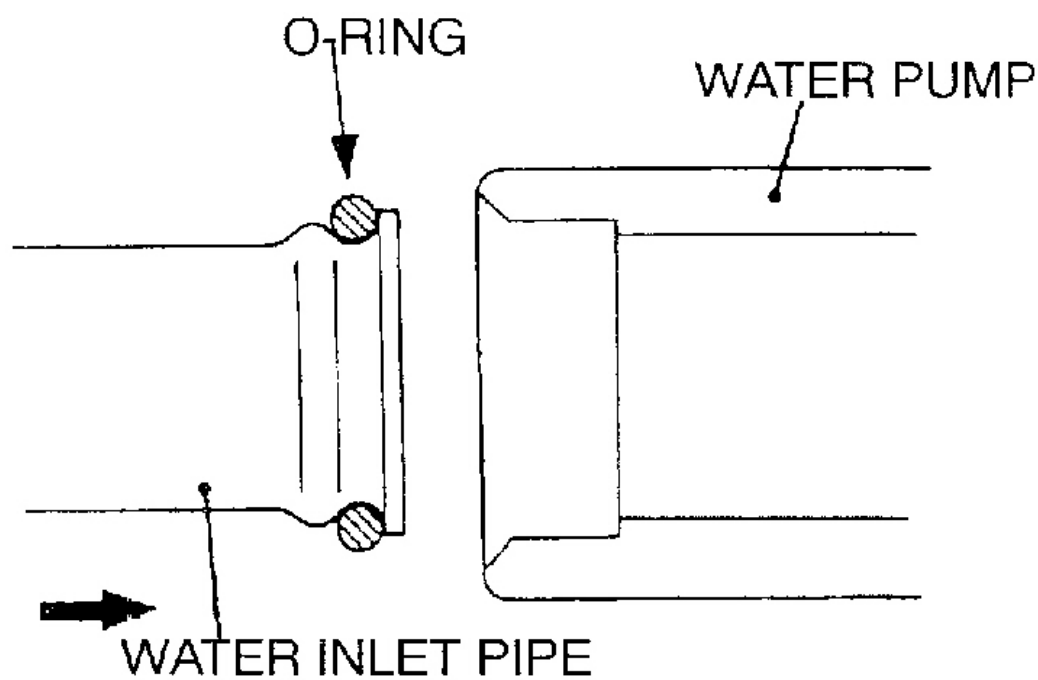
Removing & Installing Exhaust Manifold & Water Pump
